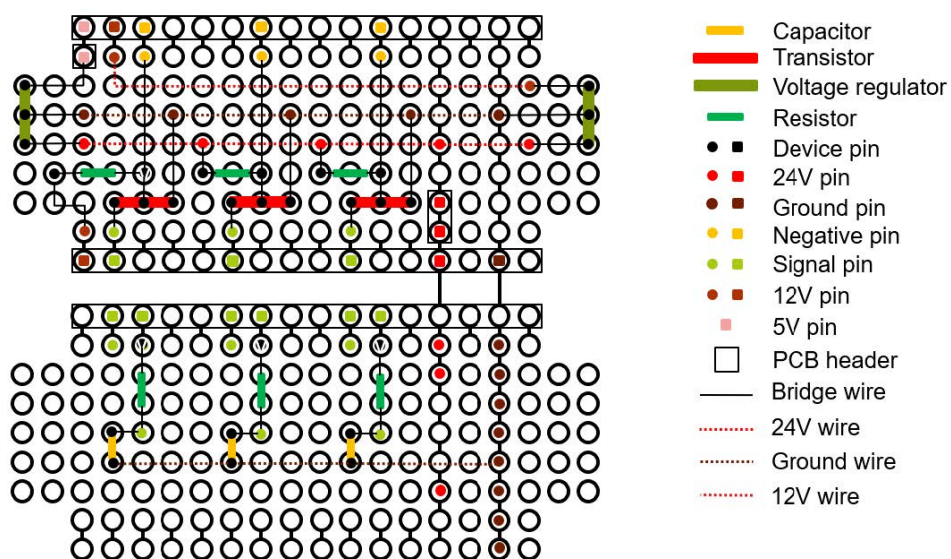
Layout of general purpose PCB. The dash lines represent wires in the back side while other devices are placed at the front side.
